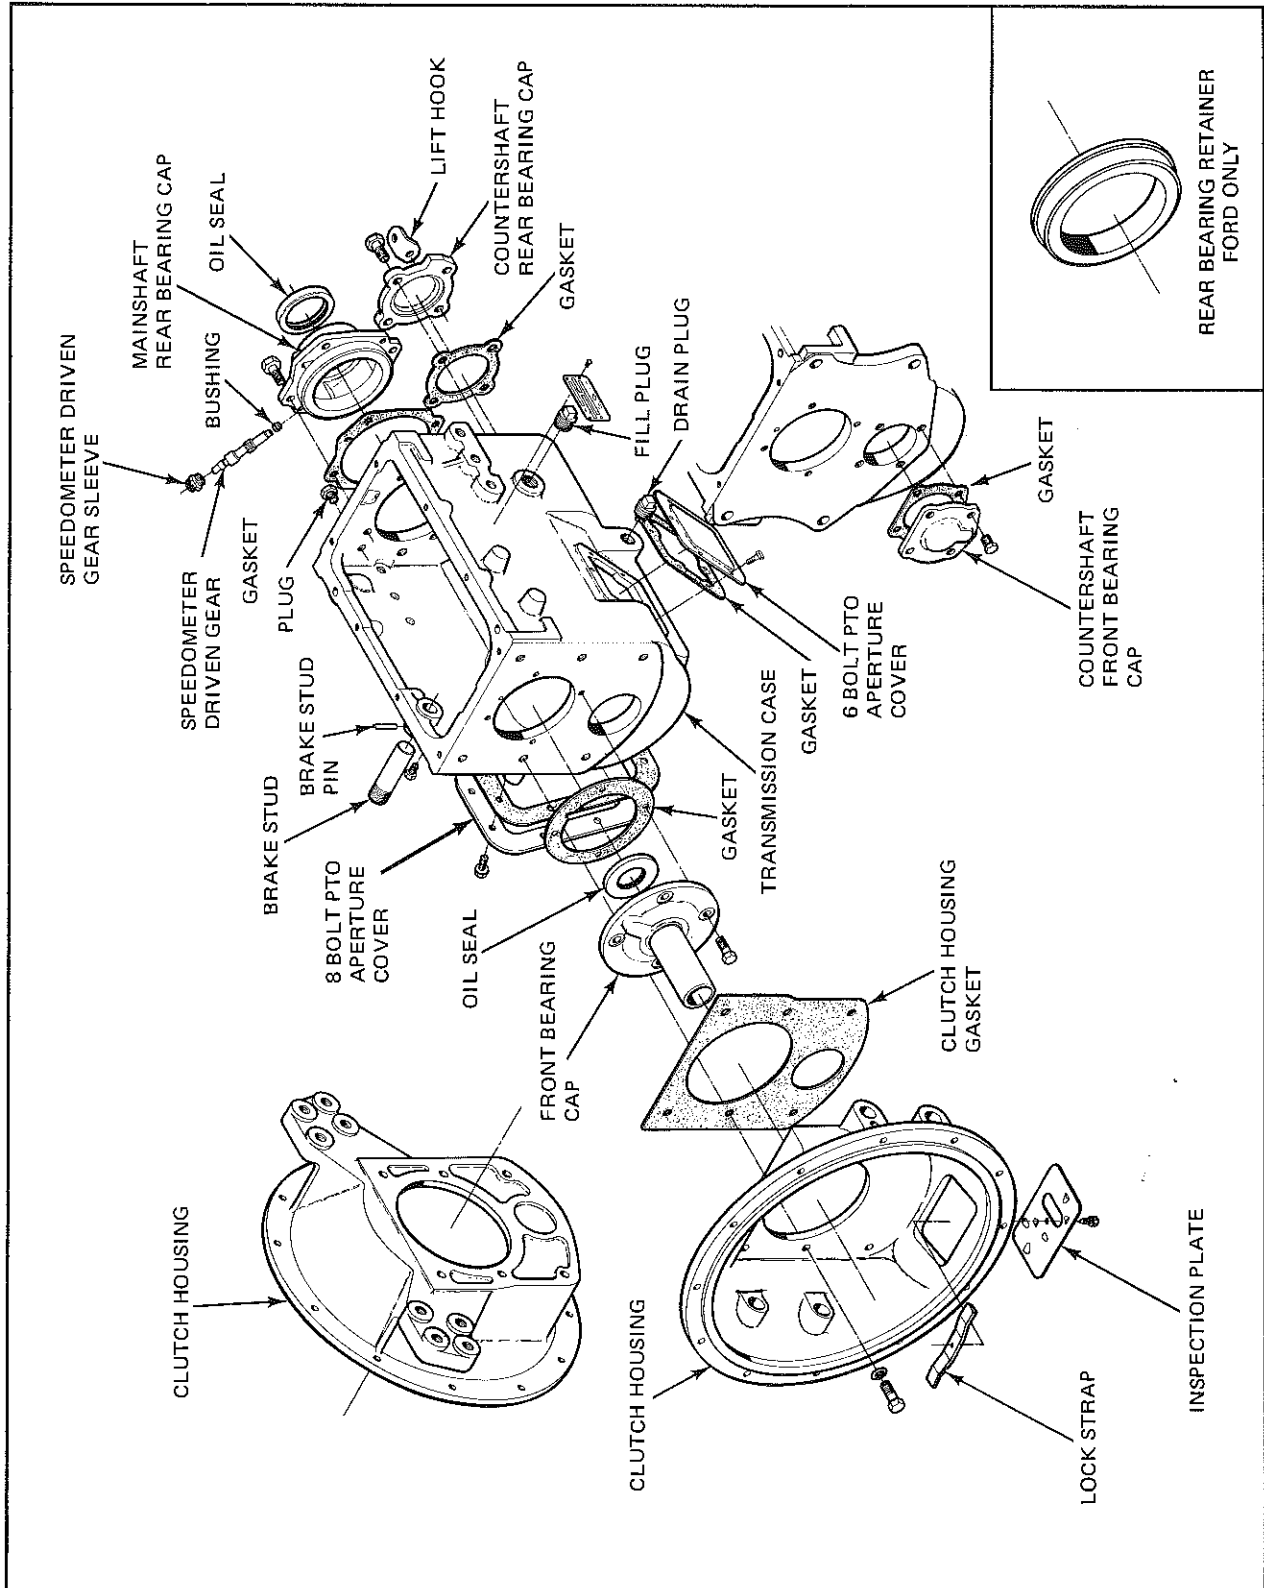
CM50 Transmission Case, Bearing Caps and Related Parts
